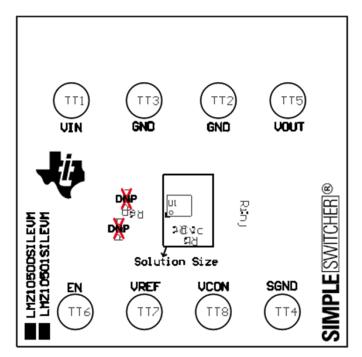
Evaluation Board Assembly (DNP = not populated components)
